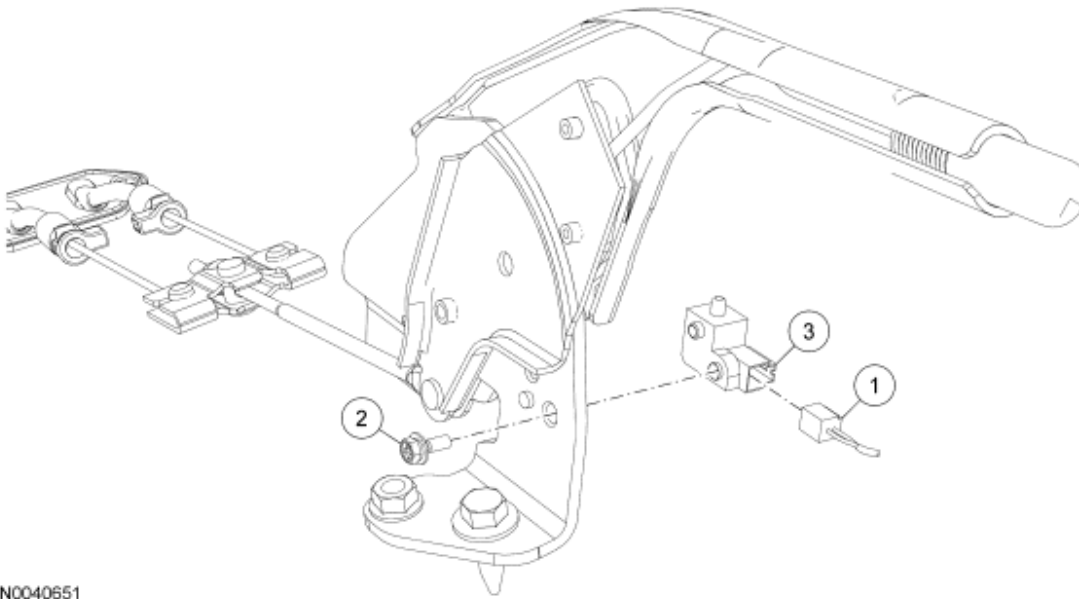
Exploded View Of Parking Brake Warning Indicator Switch
